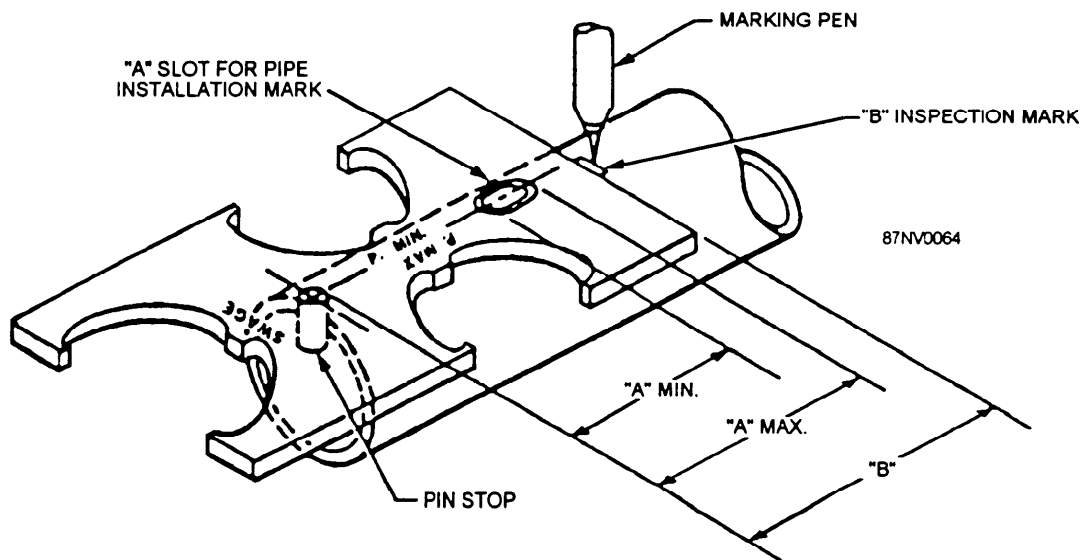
Using marking/inspection gauge to mark pipe.
